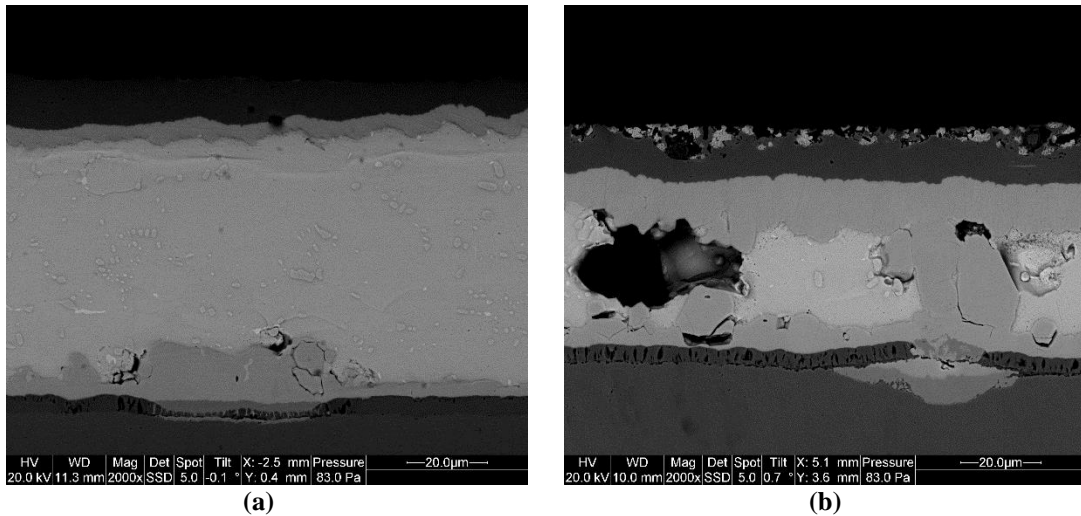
R2512 - SAC305+0.13%Ce Solder Joint (a) After 100 hours/200°C Aging, (b) After 1000 hours/200°C Aging
